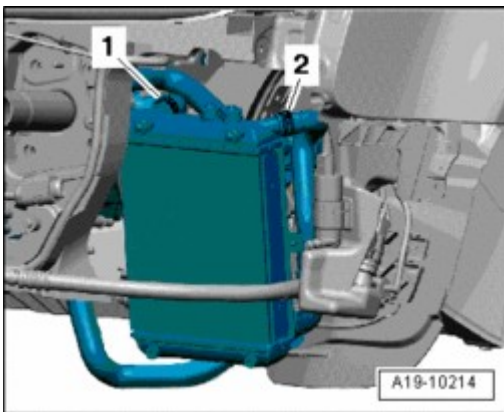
Removing Coolant Hoses From Left Auxiliary Cooler
